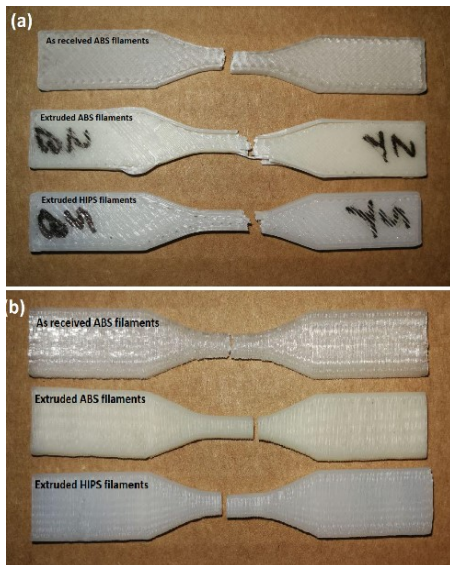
Fractured 3D printed samples in different build orientations: (a) Longitudinal (b) Transversal.
